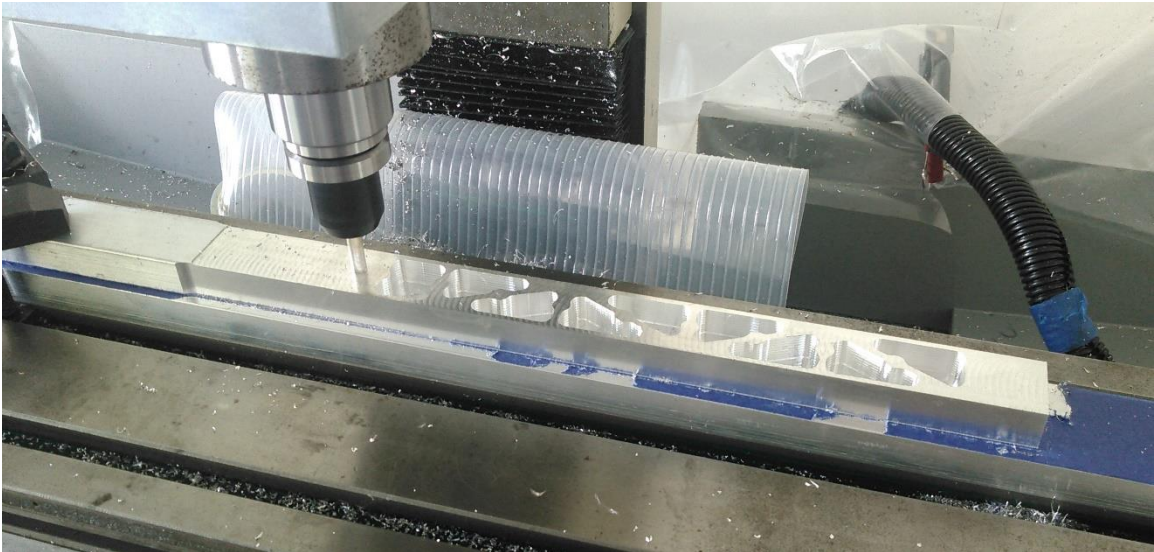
Gantry bar being milled on a small CNC using a 0.25 inch carbide endmill.
